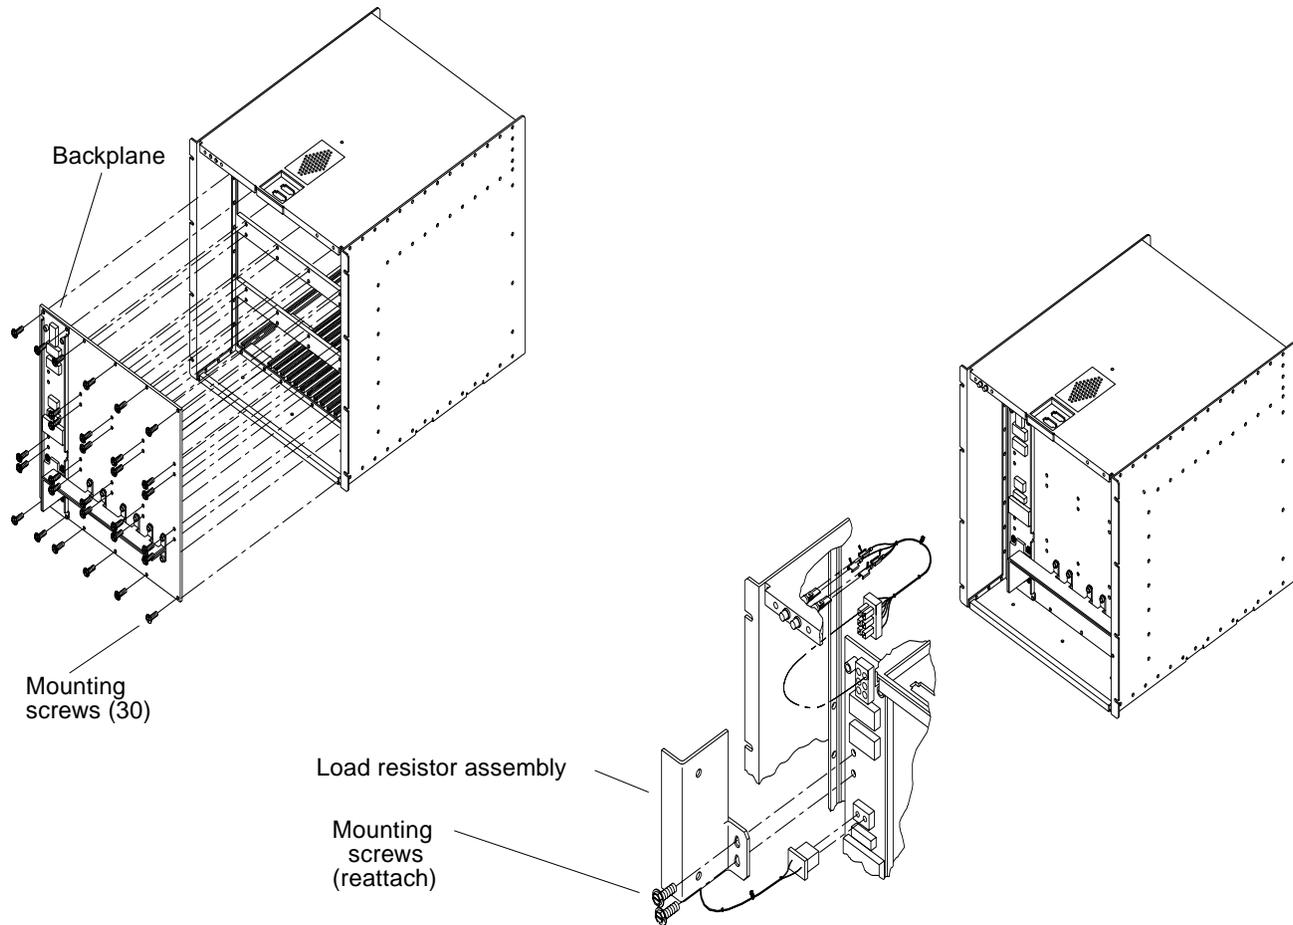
Backplane Connectors and Backplane Removal and Replacement
